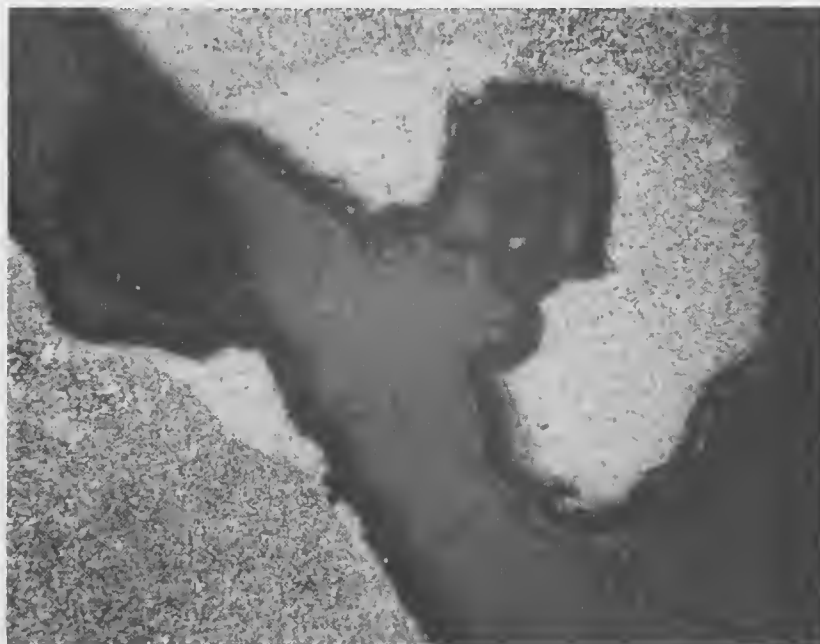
Portion of the joint shown in Fig. 5 between casting and tube at the weld showing poor weld penetration. 2% Nital etch. 50 X
